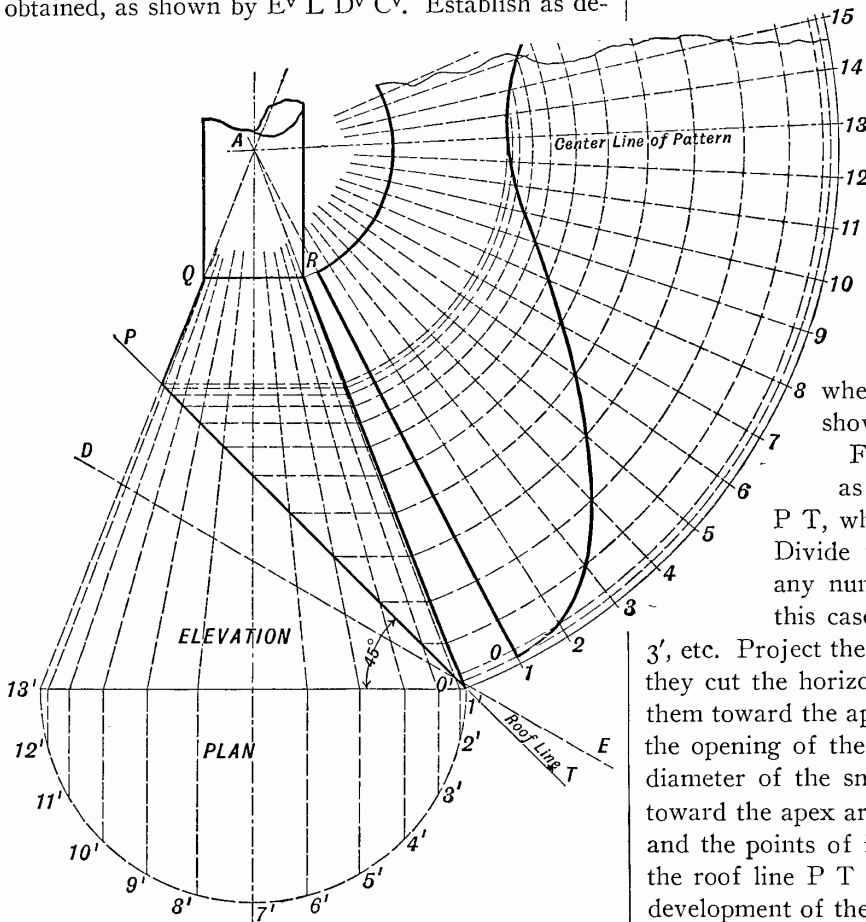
Method of Laying Out Pattern of Conical Roof Flange
